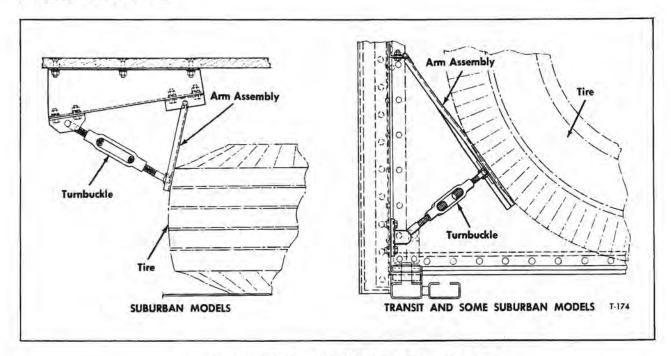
Spare Wheel and Tire Hold-Down Equipment Installed
